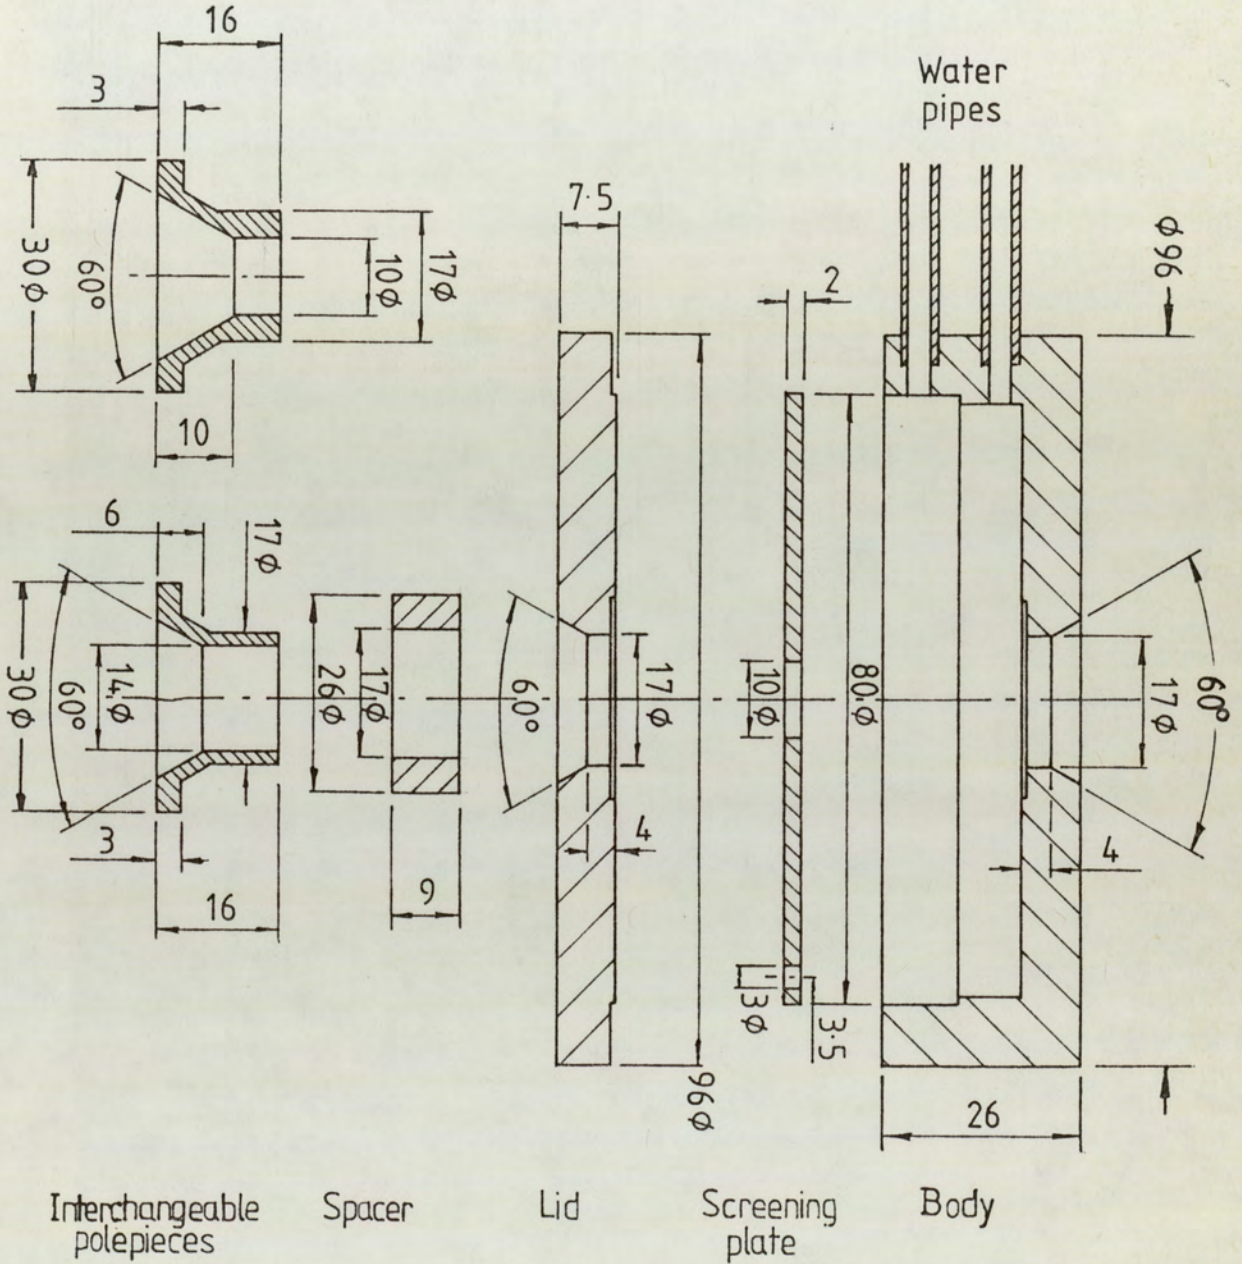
Cross section of the doublet showing the three main parts of the design besides the different replacable polepieces used. Note that the spacer is non magnetic material (all dimensions are in mm).
